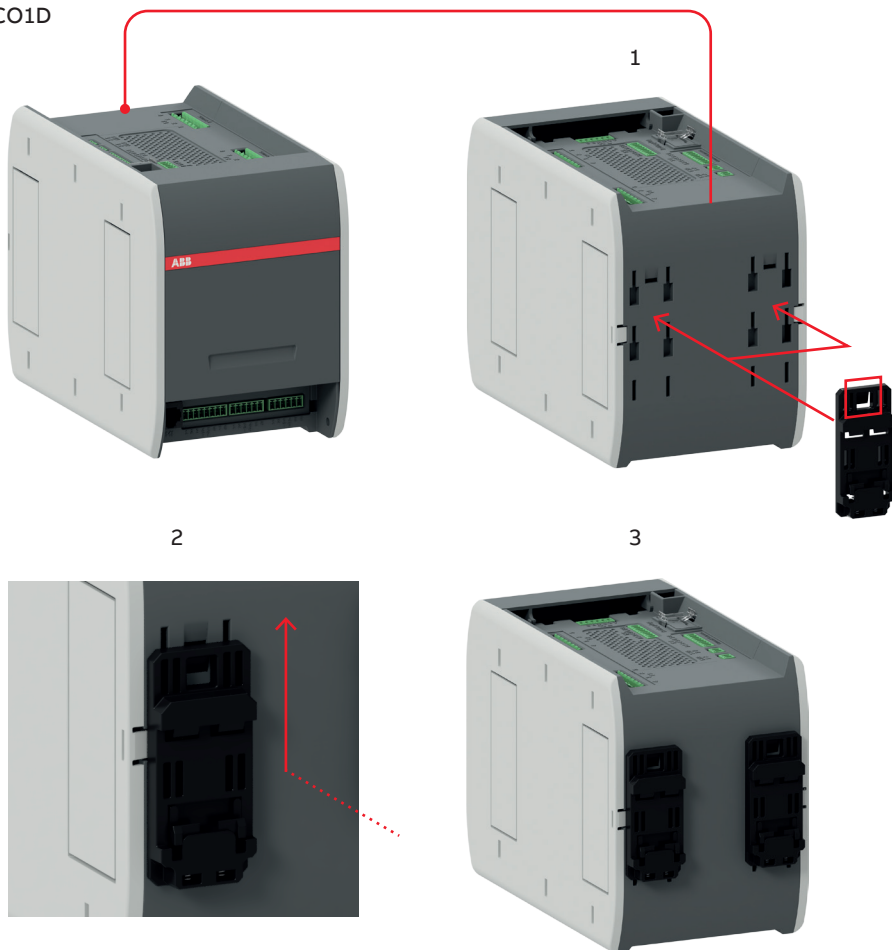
Mounting the DIN-rail mounting adapter OXCO1D on the back of ATS Controller OXCO\_.
